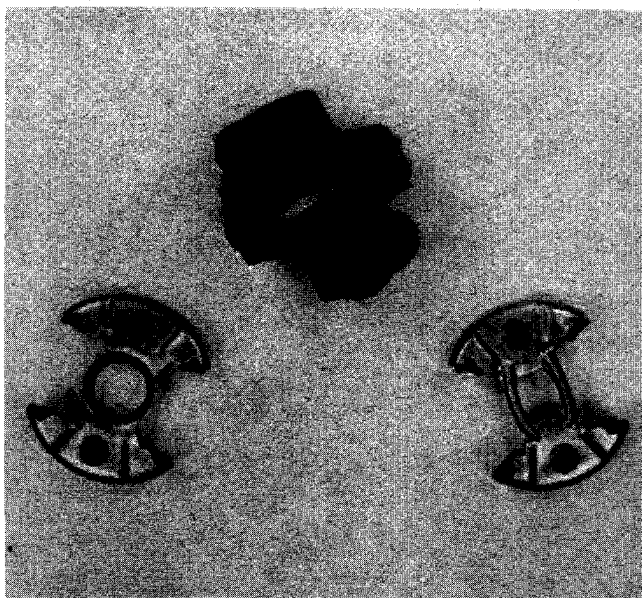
STEERING REINFORCEMENT ASSEMBLY
